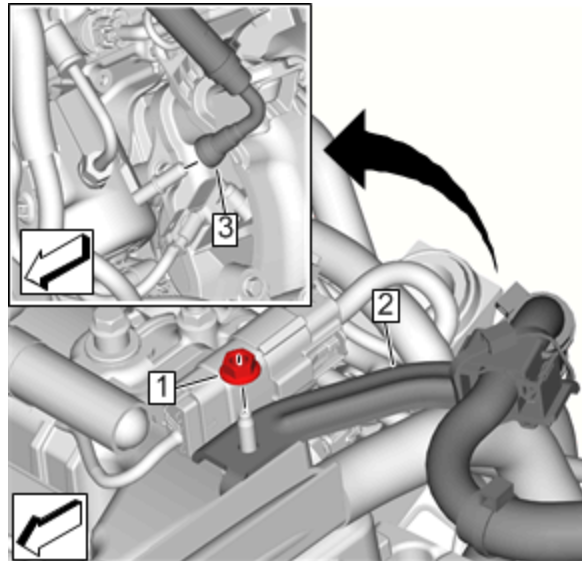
Fuel Feed Front Pipe Bracket And Nut
